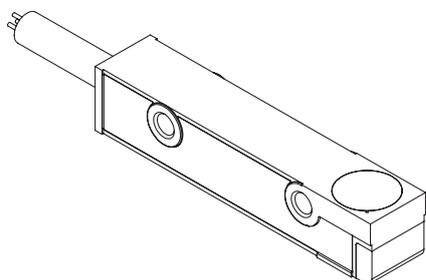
Limit switch for linear modules HM-B, linear tables HT-B and cantilever axes HC-B
